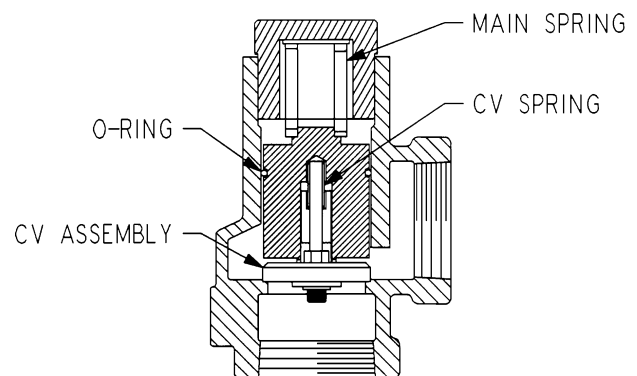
MINIMUM DISCHARGE PRESSURE VALVE
